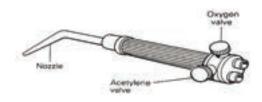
Welding torch. Source: Welding torch - Search Images (bing.com)
